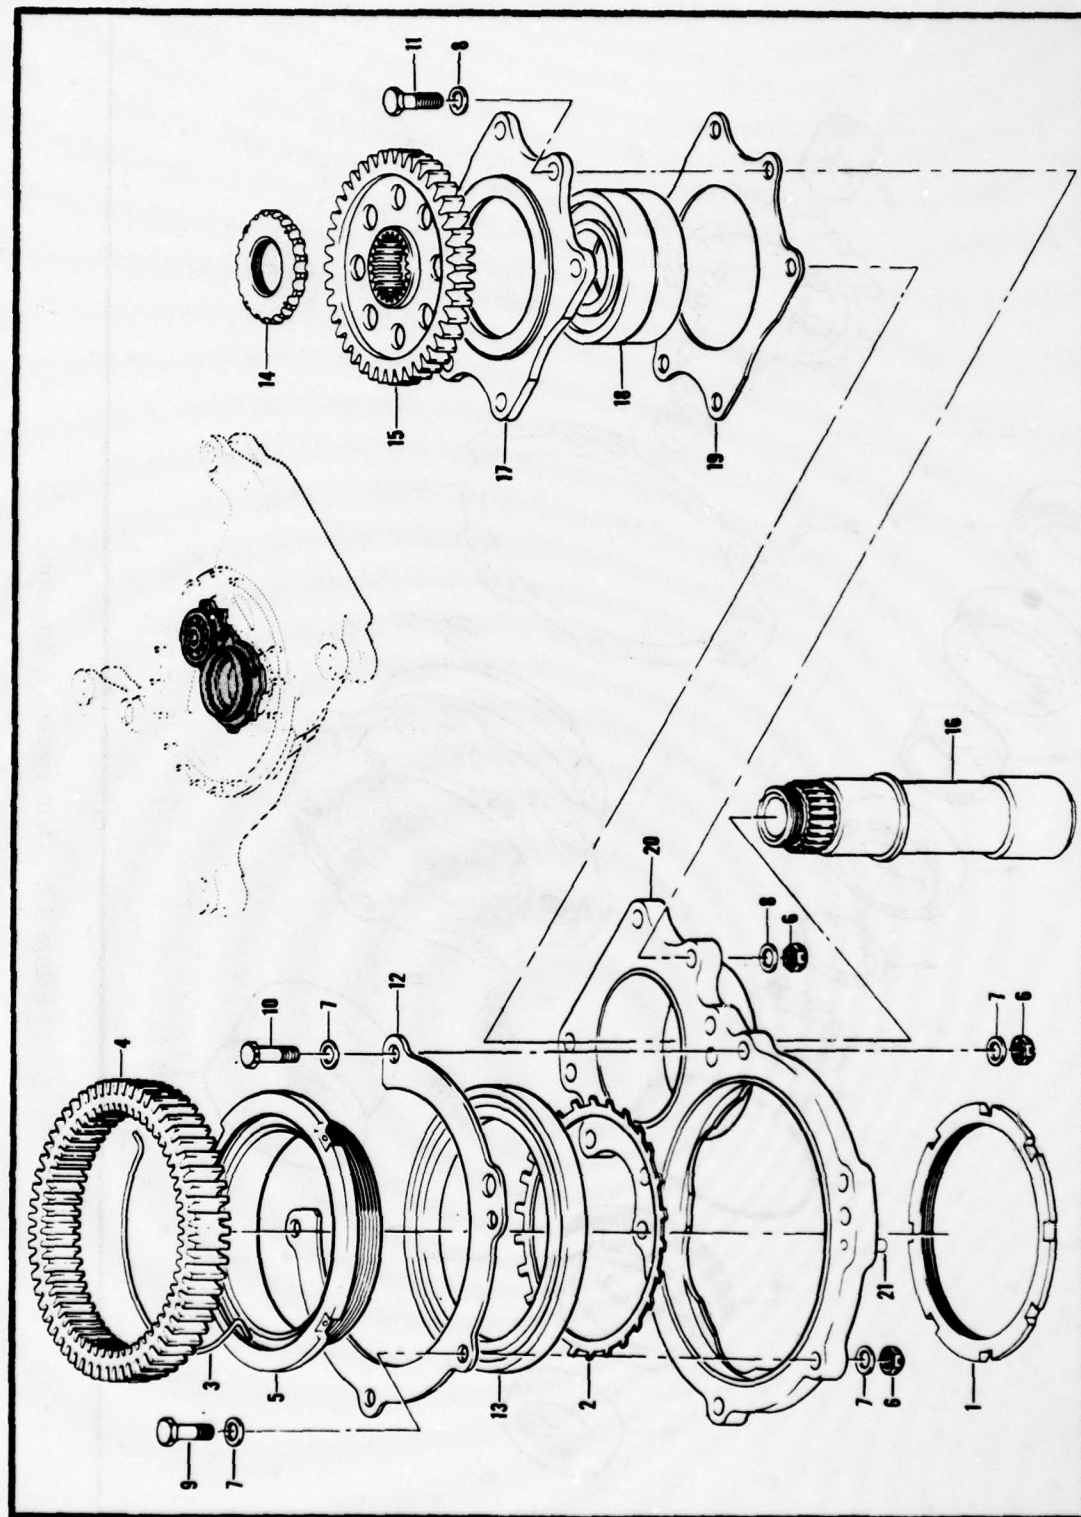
Quill assembly, offset accessory and tail rotor drive.
